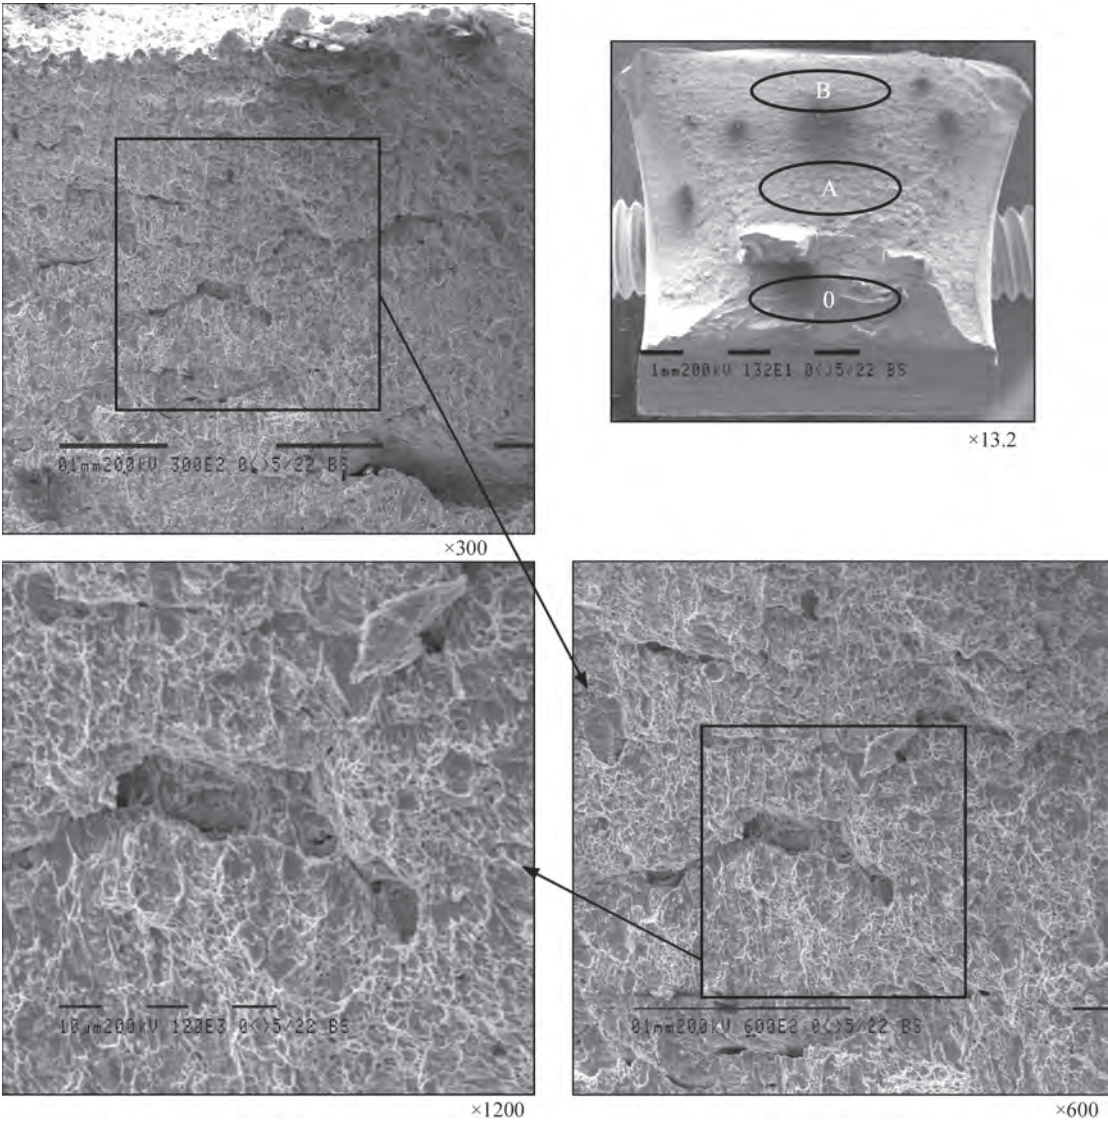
Photo with a fracture of welded joint specimens after impact bending test at $+20\text{ }^\circ\text{C}$ (zone of slow crack propagation)
